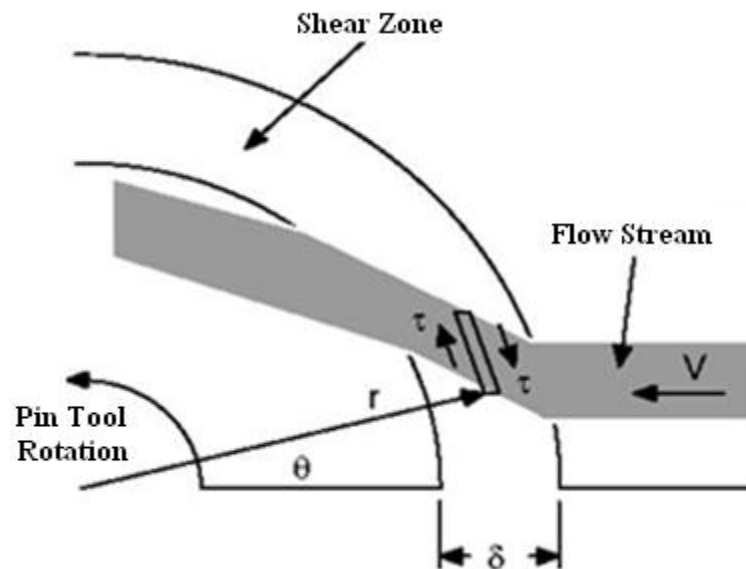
Metal entering severe shear zone surrounding tool (Schneider, et al., 2008).
